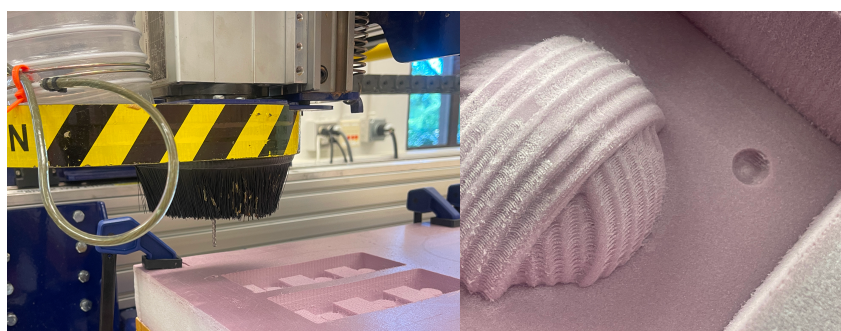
Mold making process using the CNC mill: making a negative mold in foam using the CNC mill.
